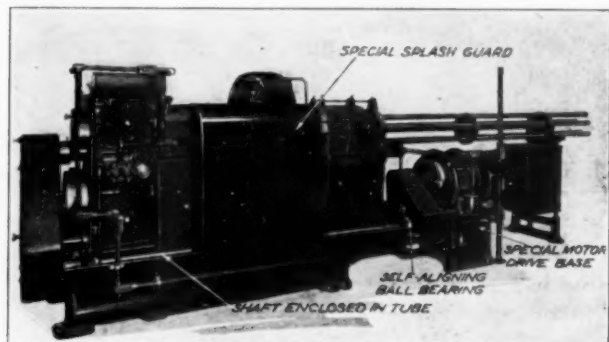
LARGE MULTIPLE-SPINDLE SCREW MACHINE WITH WESTERN ELECTRIC CO. DESIGN OF MOTOR DRIVE
